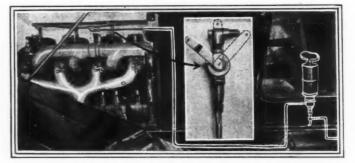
Installation of device on four-cylinder car with enlargement of cylinder attachment
